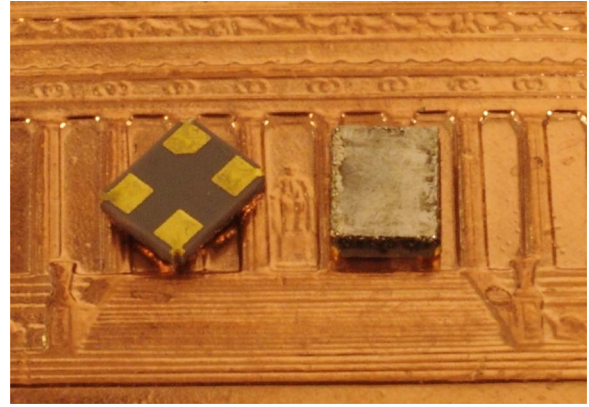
Photograph of pressure sensors with laser-welded diaphragms on a penny.
